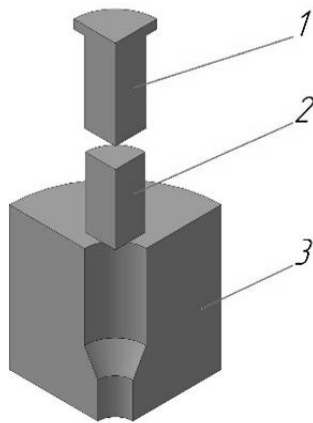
Stamp for extrusion: 1 – punch; 2 – blank; 3 – matrix
